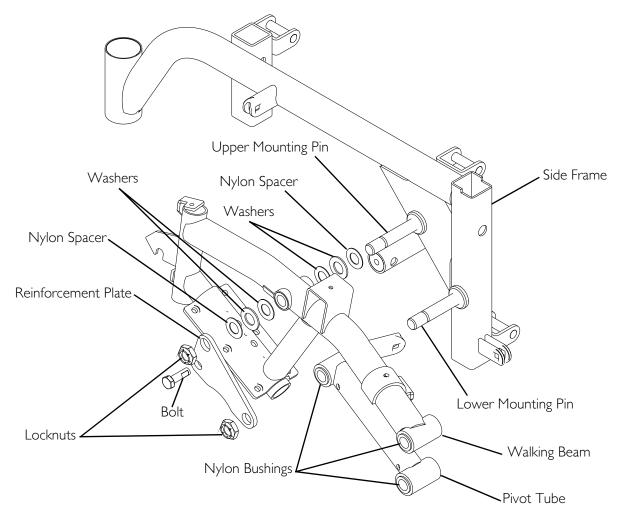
Disassembling/Reassembling the Side Frame Assembly
